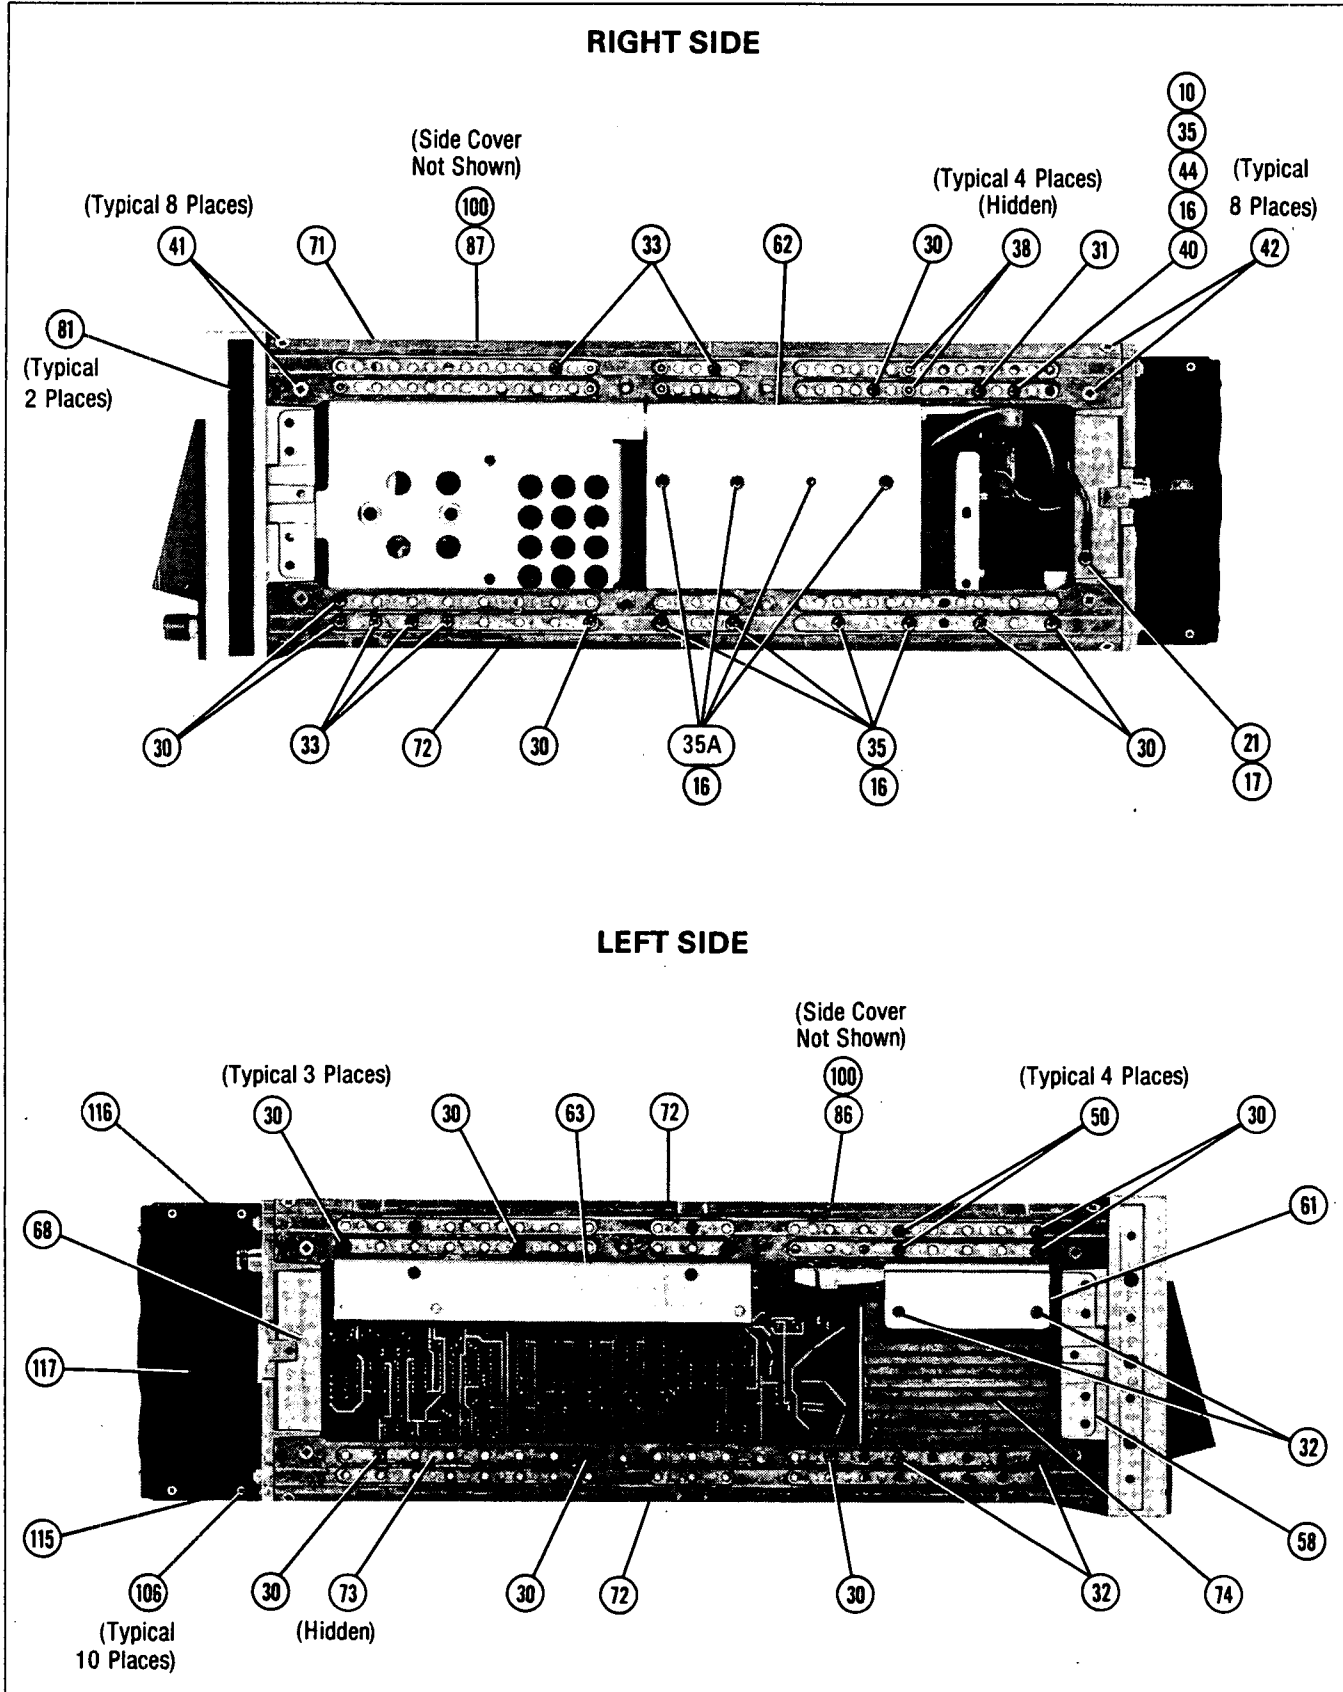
Miscellaneous Mechanical & Chassis Parts (6 of 6)
